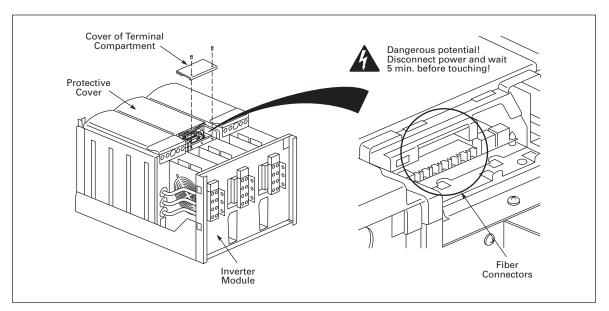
Connecting the Power Supply and Control Cables, FR13
